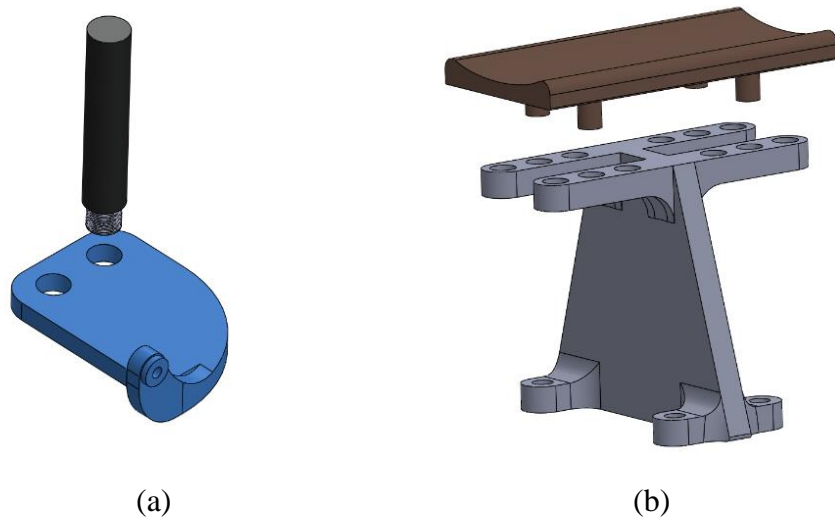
Attachment mechanism and position adjustability of, (a) handle, (b) saddle-shape forearm support.
